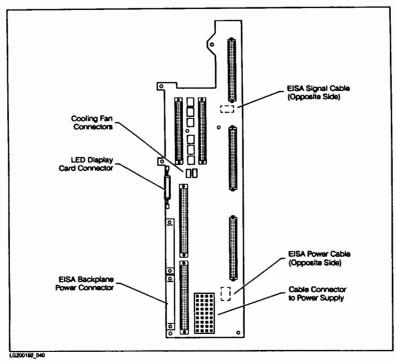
15. VSC Backplane, Front and Rear Cable Removal
